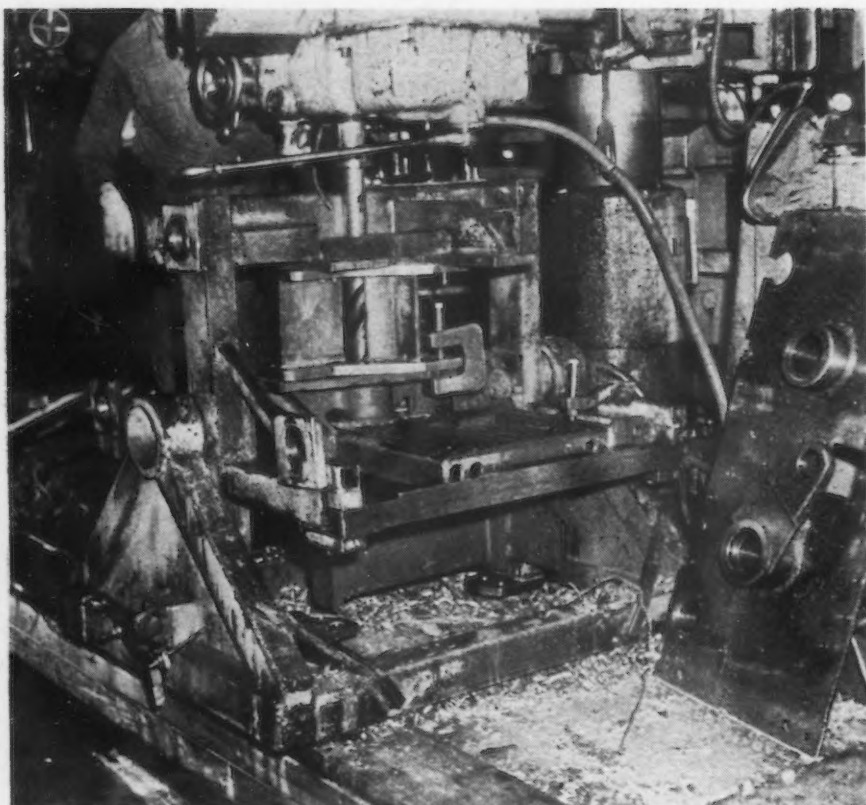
A roll-over type special welded fixture for machining a power control unit frame gear case and bolt plate structure. This fixture facilitates machining by reducing setup time, layout and handling. Note drilling jig with welded stops and hardened bushings at right.
